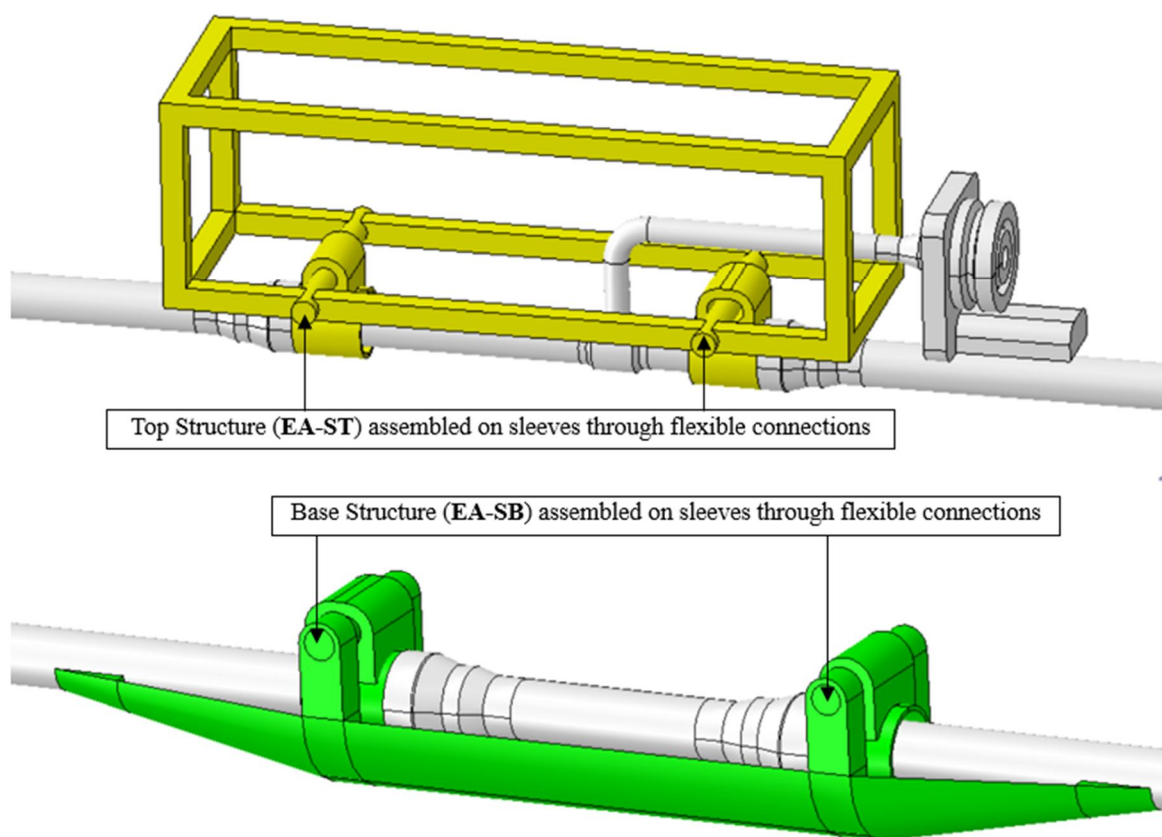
Examples - Flexible Connection of Top Structure and Base Structure to Bulkheads
